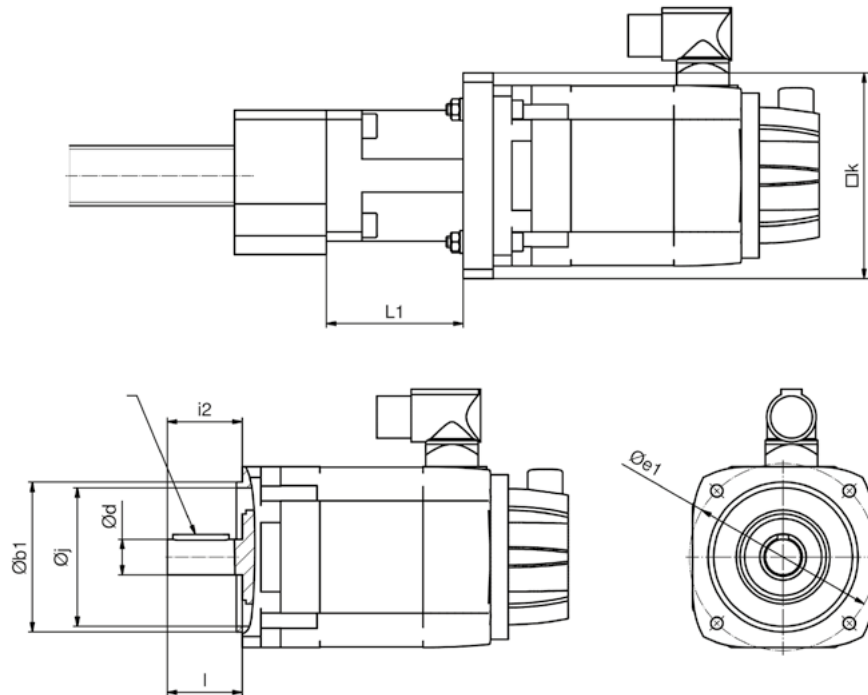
Dimension of standard coupling cones for BSTK bearing units
